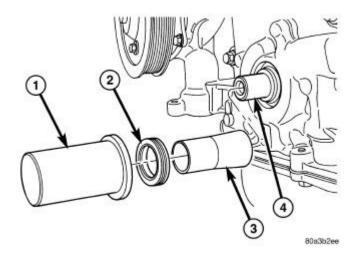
CRANKSHAFT FRONT SEAL INSTALLATION Courtesy of CHRYSLER LLC
